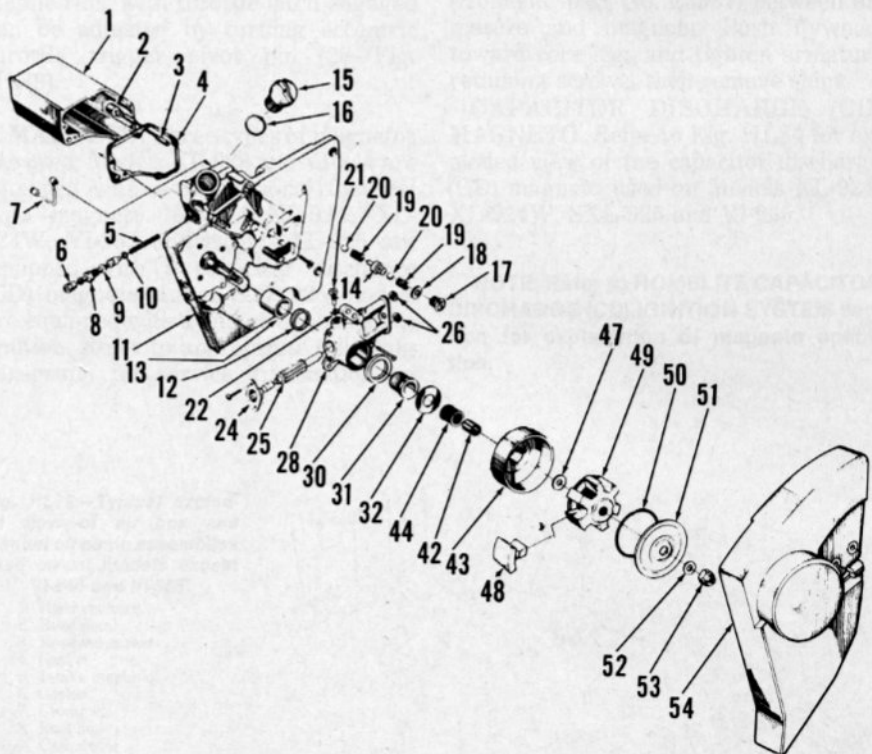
Exploded view of Model 1050 Automatic chain oiler pump and related parts; other models are similar except for ball bearing main instead of needle bearing. Refer to Fig. HL74 for view showing pump operation.
